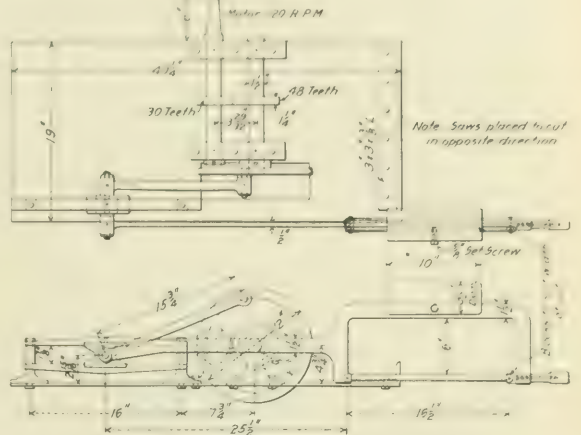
Portable Hack Saw Driven by an Air Motor.
